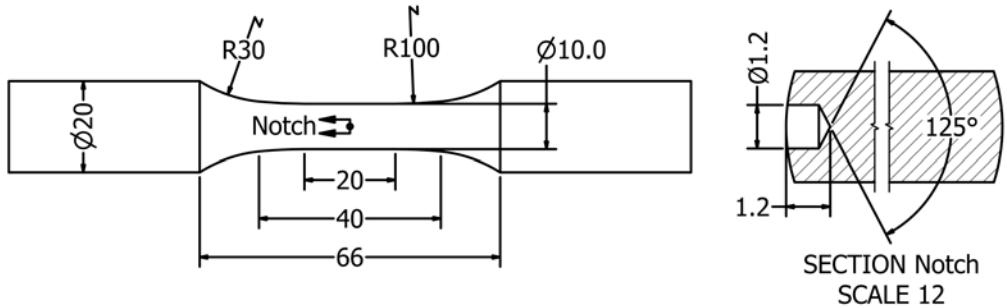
Dimensions and geometry of the notched test bars used in Paper A. Dimensions in mm.
